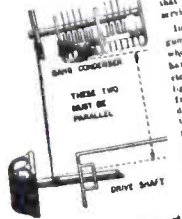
As illustrated above, the state of all shafts in a dial assembly must be gauged for proper operation.
